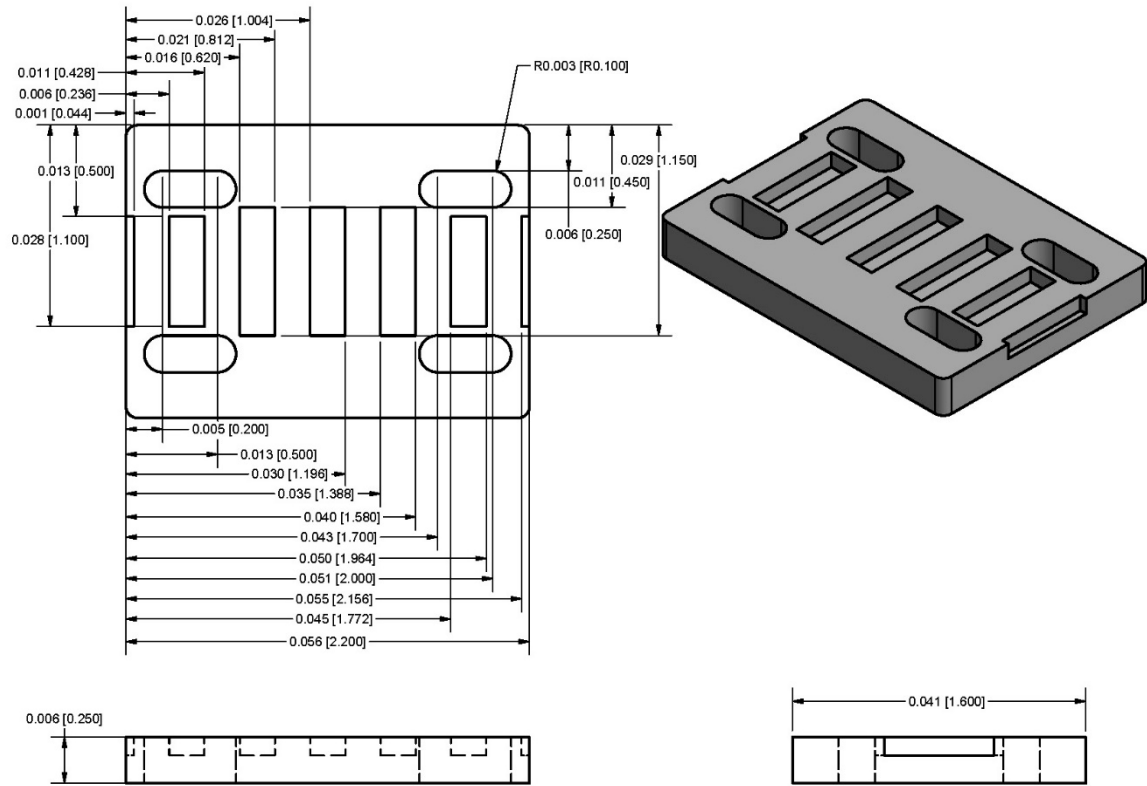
Upper part of the belt mount to transfer the force from timing belt to the carriage assembly.
